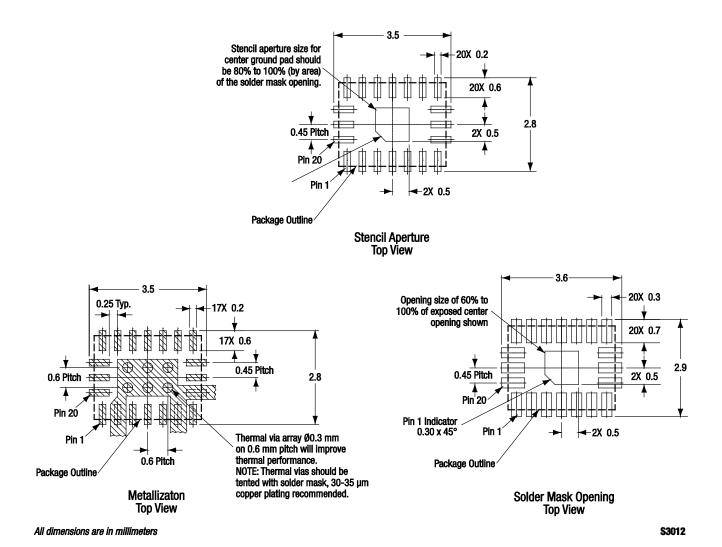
SKY13441 PCB Layout Footprint (Top View)
